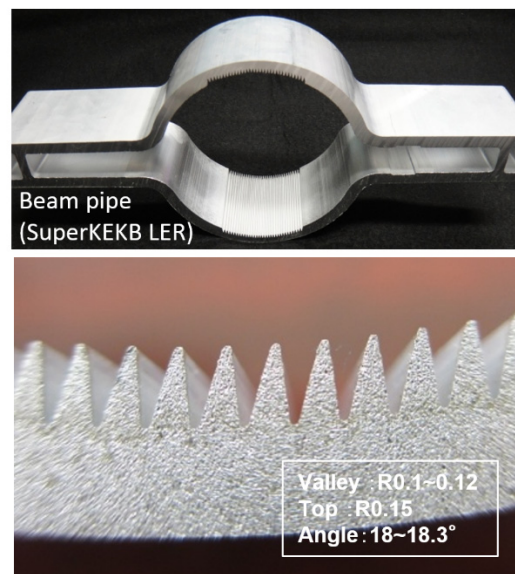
Grooved structure on the top and bottom of the beam channel of the new beam pipe.
